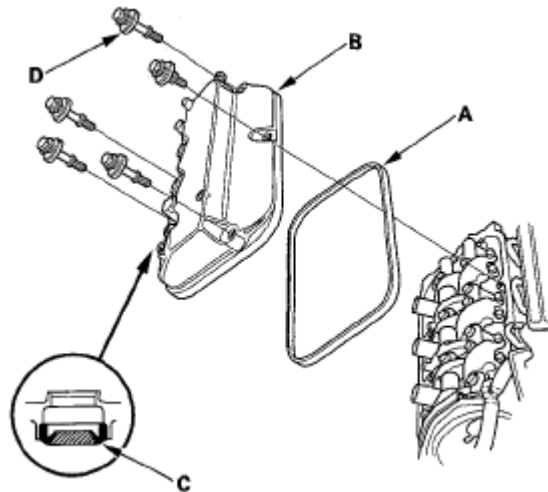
Identifying Head Cover Gasket And Bolts - Rear
